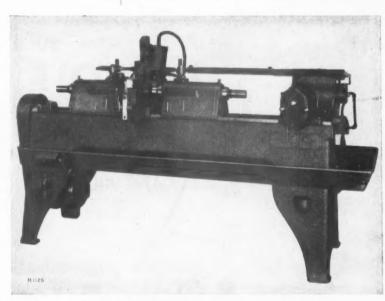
Sundstrand No. 56 Drilling and Centering Machine with standard autometic cycle unit and special pneumatic magazine fixture.
